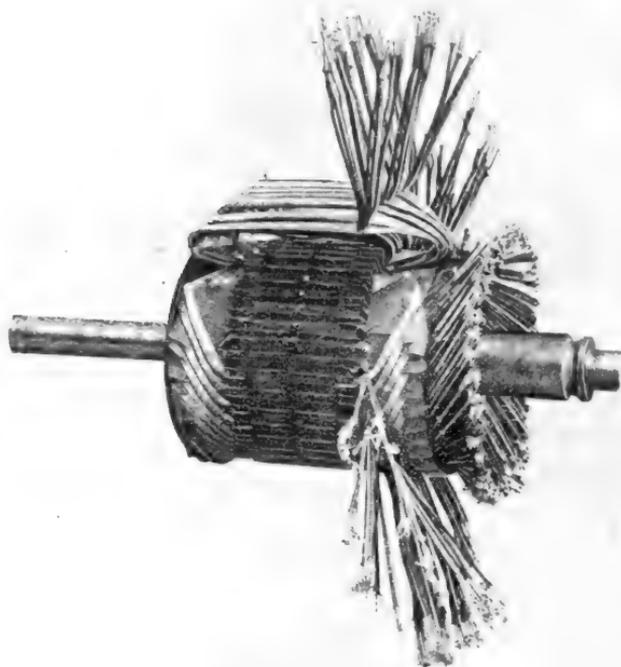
Assembling Wire-wound Coils (Lancashire Dynamo and Motor Co.).
